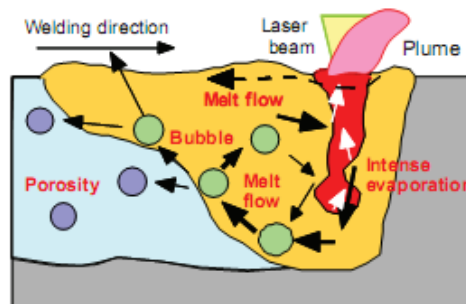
Melt flow inside keyhole at low welding speed [122]
